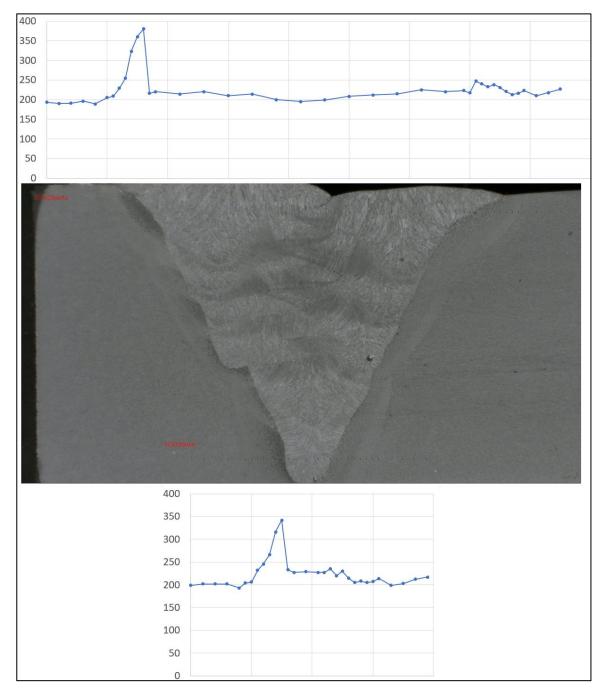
Hardness throughout complete weld cross-section in S15020
